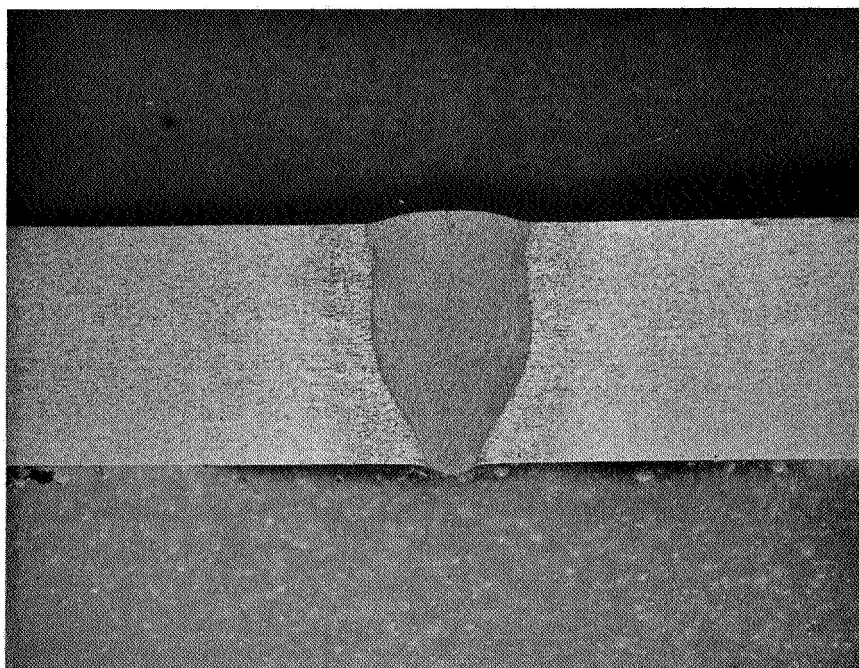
Radiograph and Weld Cross Section of a Typical Weld Produced at Long Work Distance (9/16 in.) and High Gas Flow.
